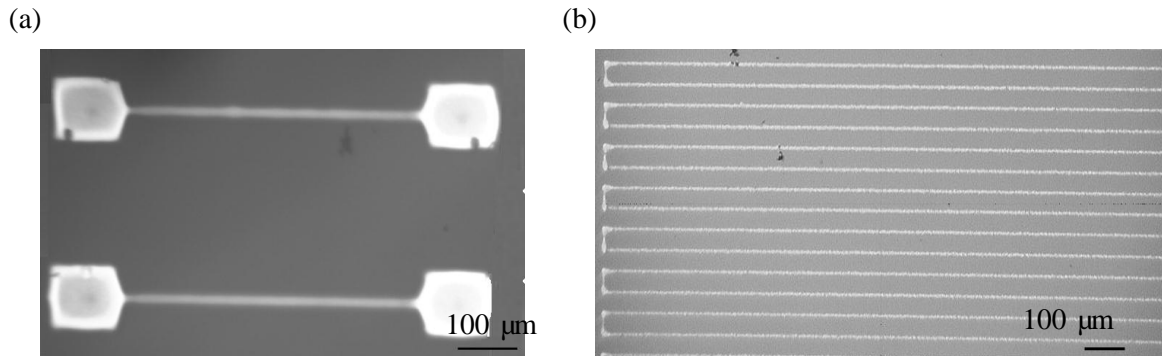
Printed electronic components: (a) printed metal pads and interconnects (b) an inductor
